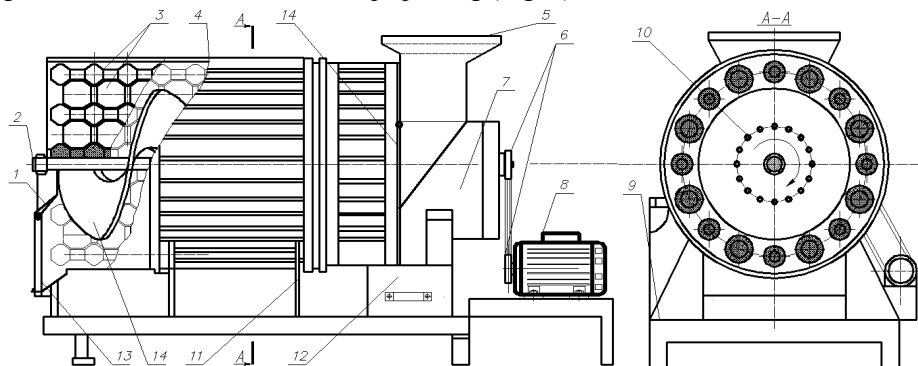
General view of the machine for root crops peeling: 1 – hole for unloading; 2 – rotary shaft; 3 – peeling rollers; 4 – processing drum; 5 – loading hopper; 6 – pulleys of a crane gearbox; 7 – drum drive case; 8 – electric motor; 9 – rack; 10 – nozzles for steam supply; 11 – drum support; 12 – electrode steam generator; 13 – door for unloading; 14 – drum auger
